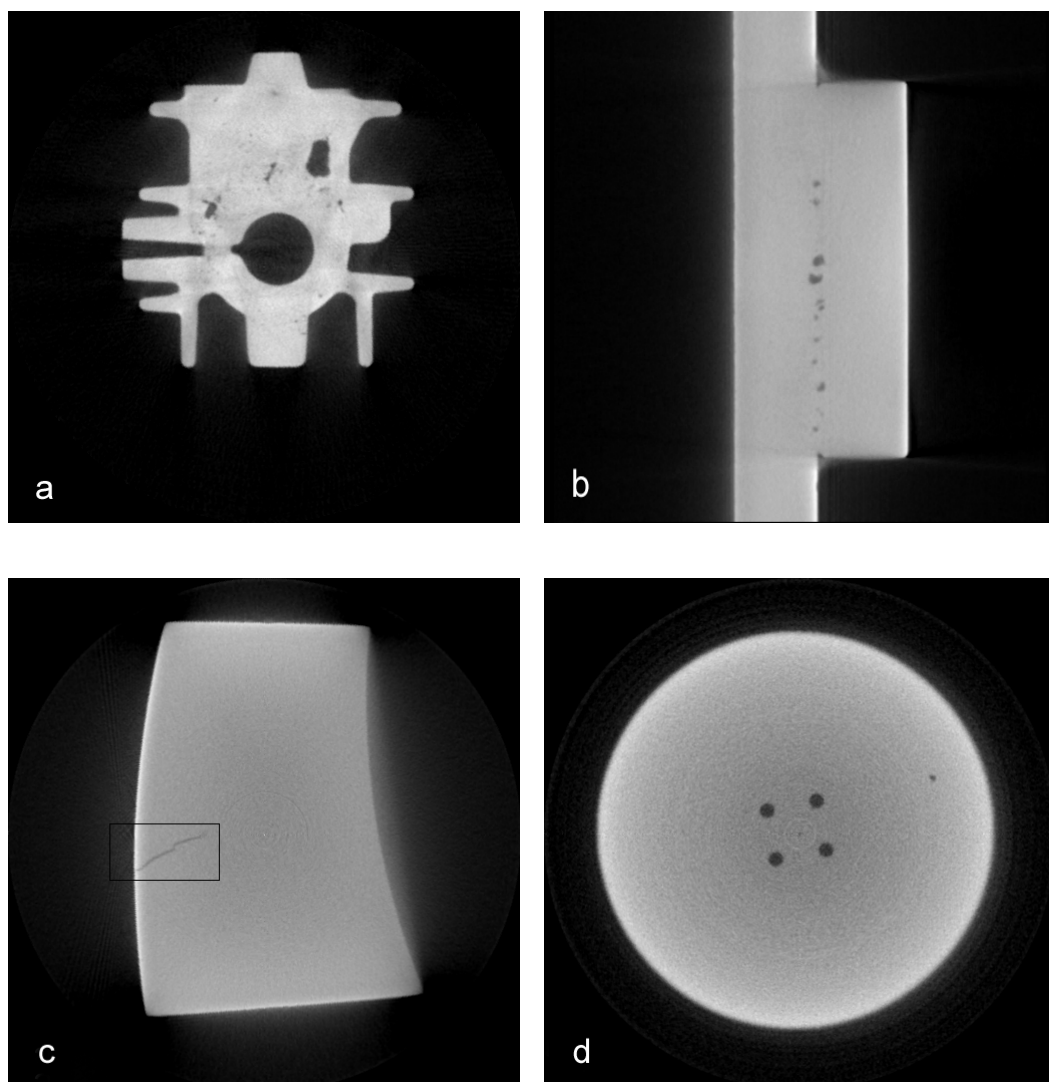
Examples for industrial inspection tasks. (a) Pores and contraction cavities in castings, (b) and (d) welding defects, (c) crack.
